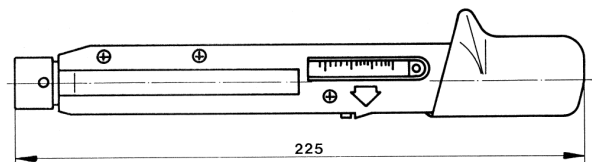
Torque wrench 4 ... 20 N·m Type 1300A39
